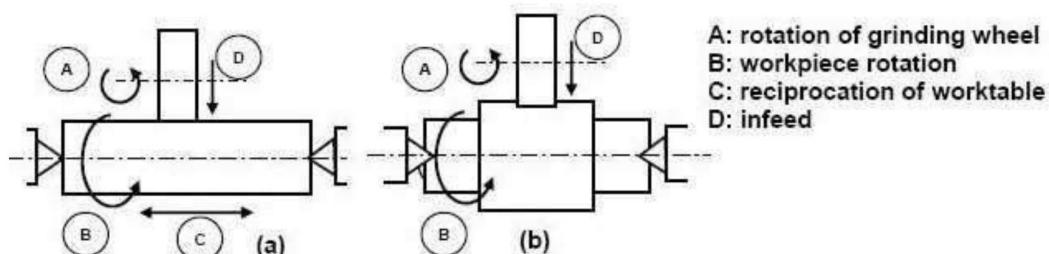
Cylindrical grinding process (a) traverse grinding and (b) plunge grinding
